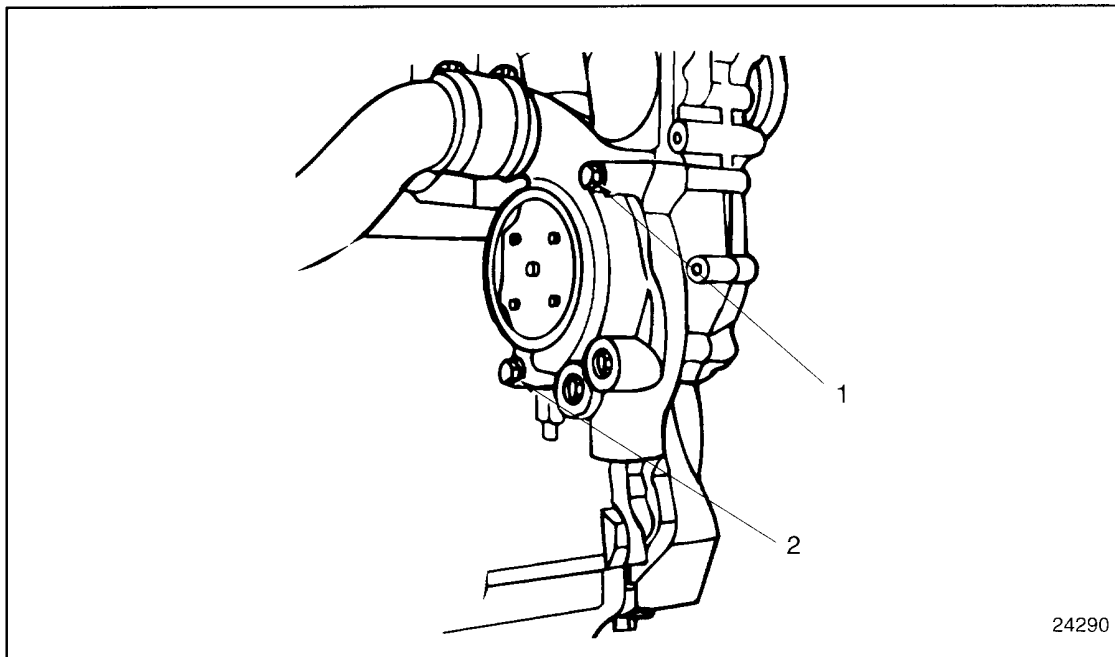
Gear Case Cover Bolt Arrangement (Right Rear)
